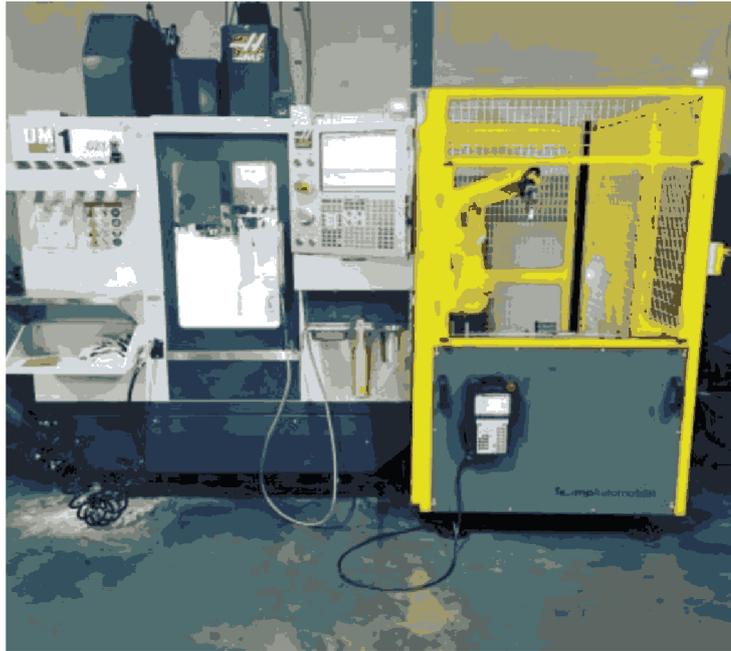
Milling robotic technological complex based on the HAAS DM-2 machine tool
